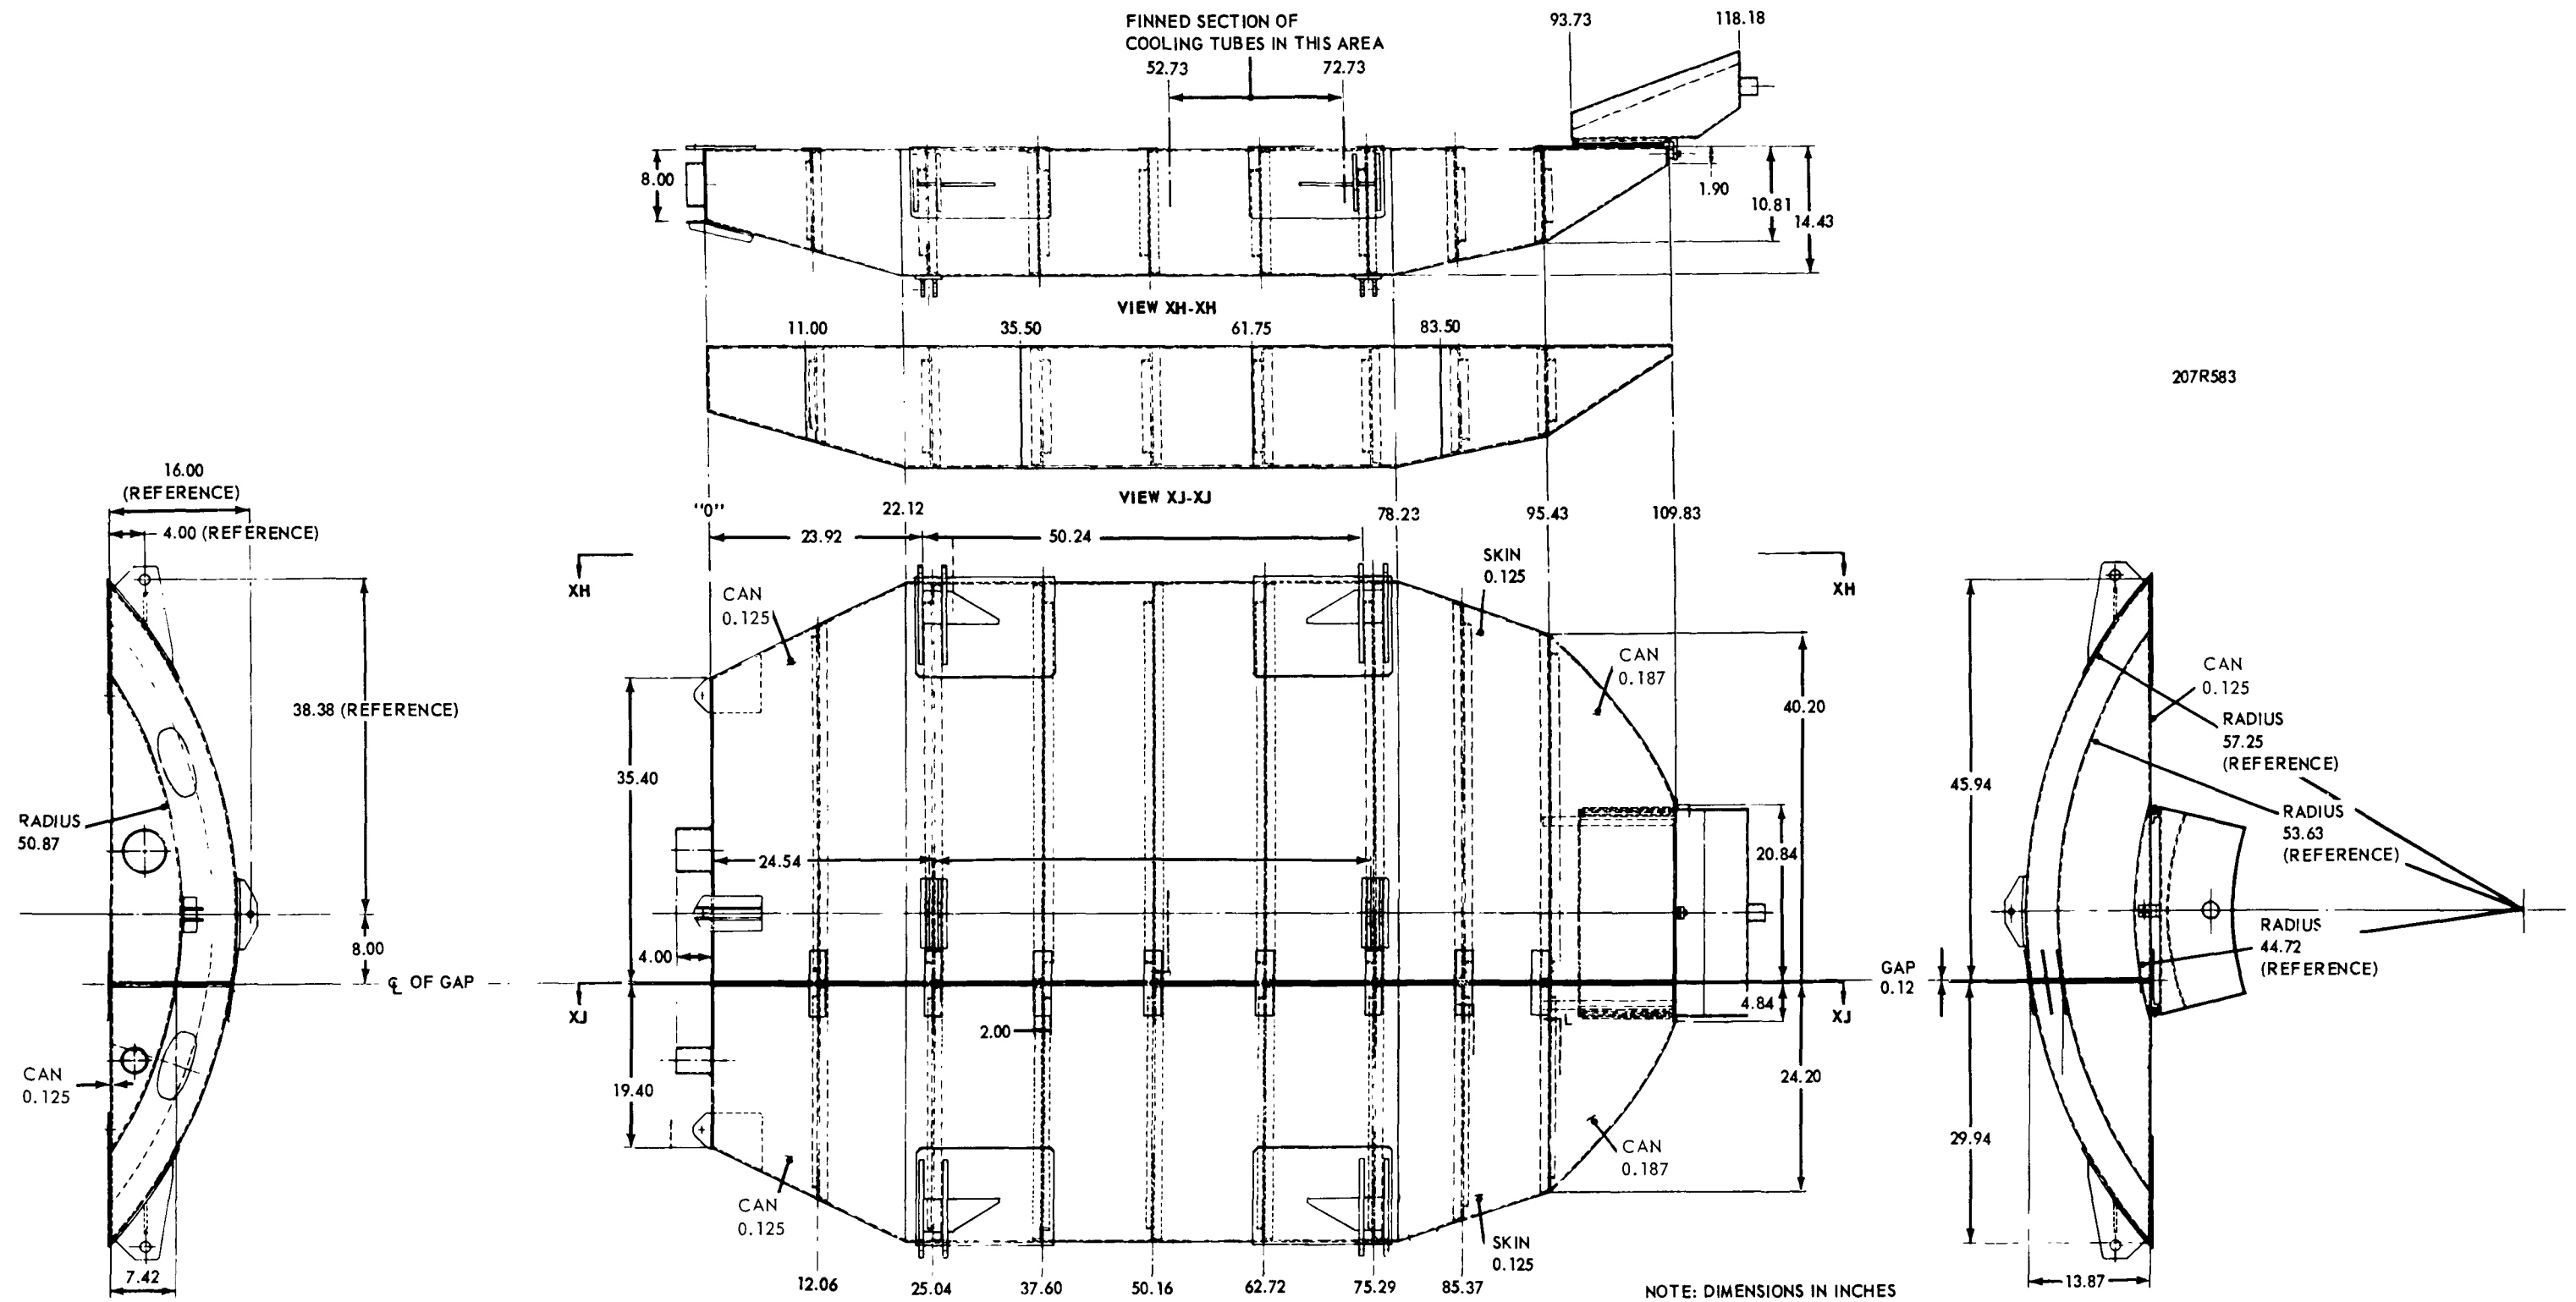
Shield check assembly for XNJ140E-1 side shield (Dwg. 207R583)
